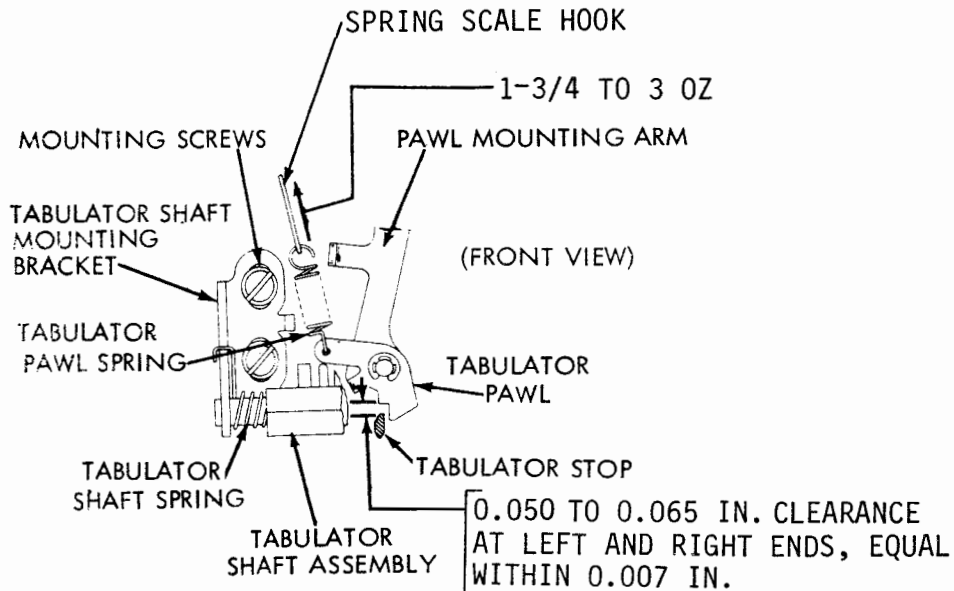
Tabular Shaft Mounting Bracket and Tabulator Pawl Springs
